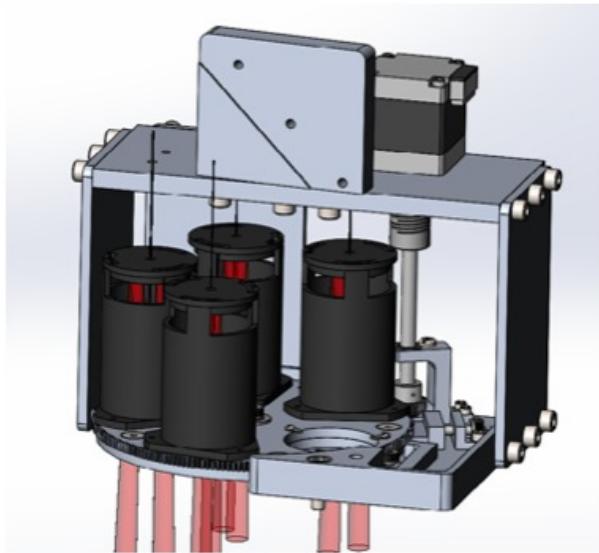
The ALES magnifier wheel assembly. A stepper motor adapted for cryogenic operation is used to drive a wheel that can insert any of the three magnifiers or allow for an unmagnified beam to proceed through to the detector.
